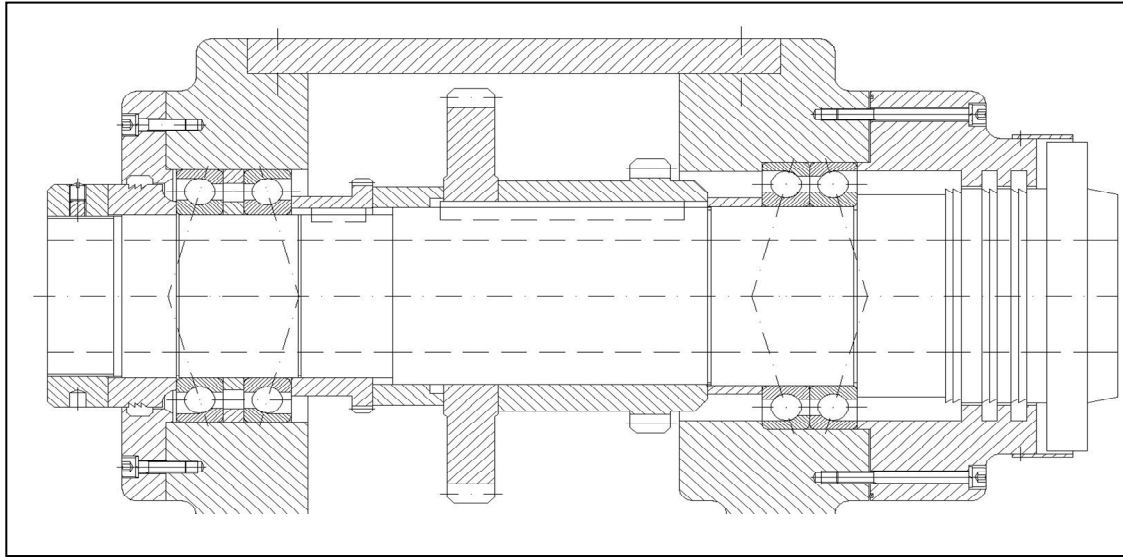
The Headstock of the precision boring machine DB24 by Eislinger, [6]
